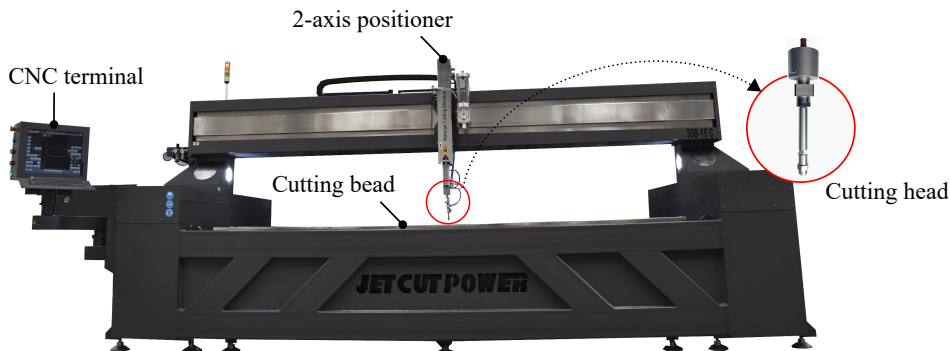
Example of a work station used for waterjet cutting: CNC work station guiding a cutting head over a work peace to cut a desired 2D-contour.²
